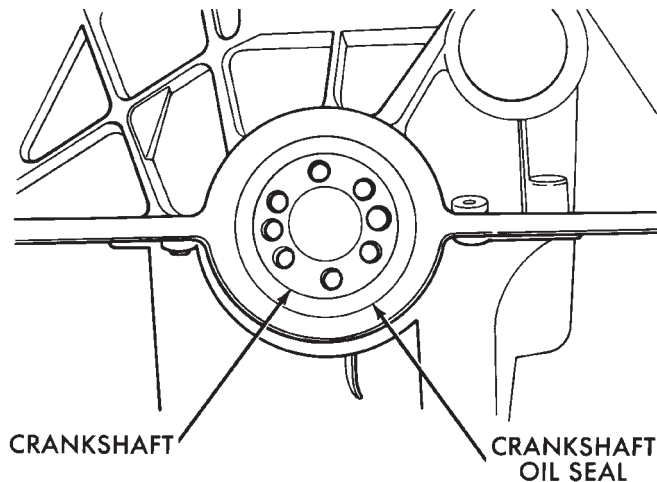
Replacement of Rear Crankshaft Oil Seal
